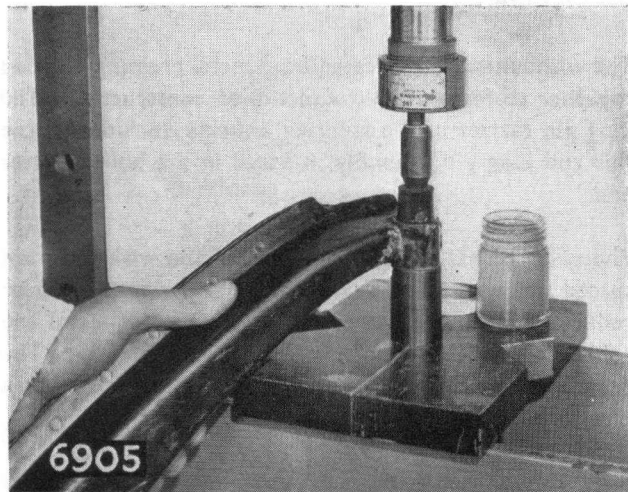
Pressing the metal and rubber bonded bush into the wishbone using the smaller diameter spigot of the RG386 tool
